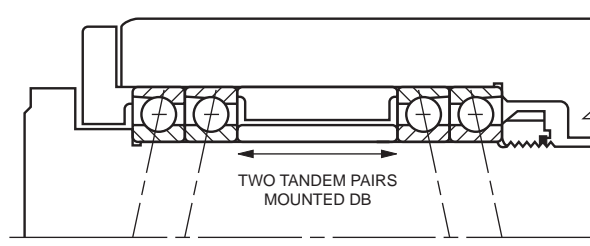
DT-DB Mounting, Fixed (Suggested)
